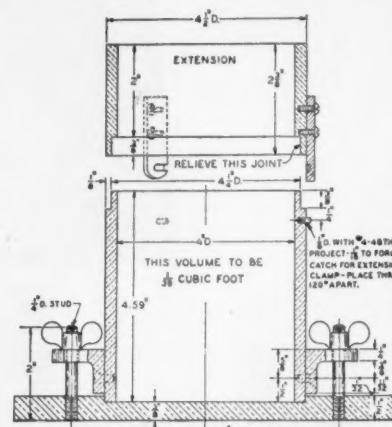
Cylindrical Mold, 4.0 in., for Soil Tests.
